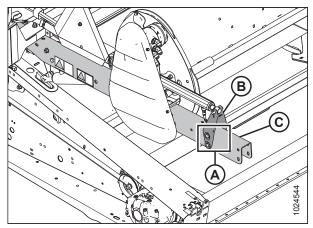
Right Reel Arm Cylinder in Aft Position
